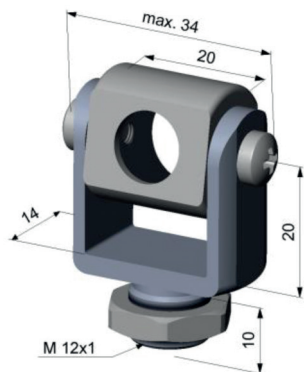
Mounting fork with M12x1 thread, adjustable in 2 axes [TM-MG-CS]
